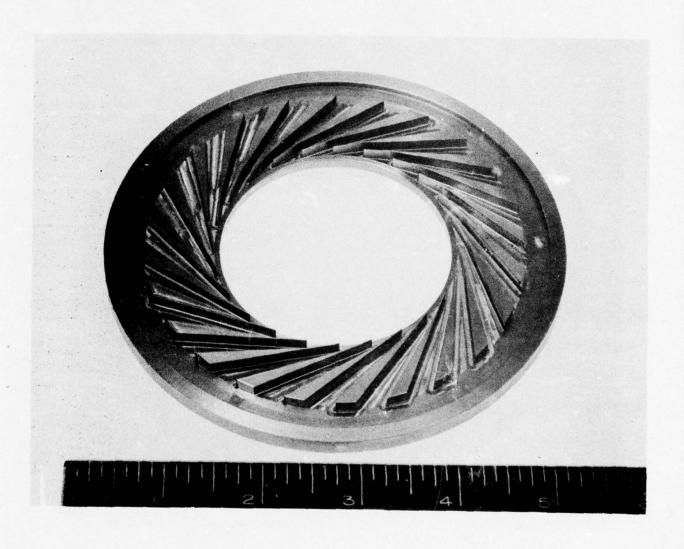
Photograph of 1.5/3 KW Diffuser Showing Machined Vanes.
